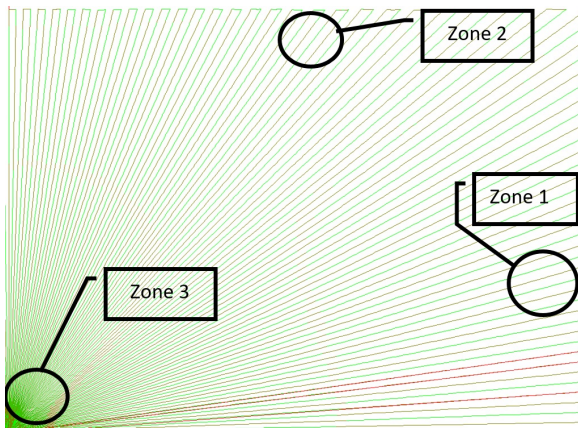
Measurement zones for machined surface roughness for EXP 2 (SR2+SF2)
